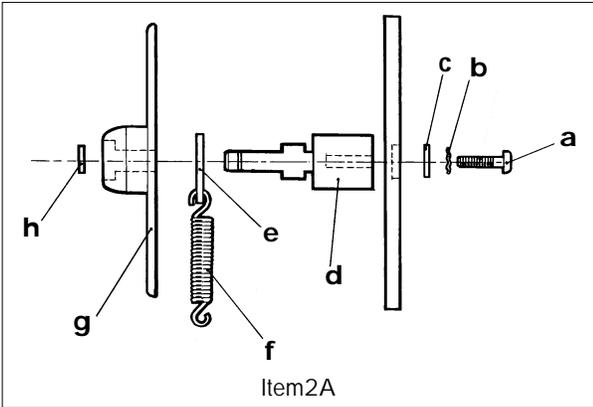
Exploded diagram: Writing system (original design) sheet 2 of 2
